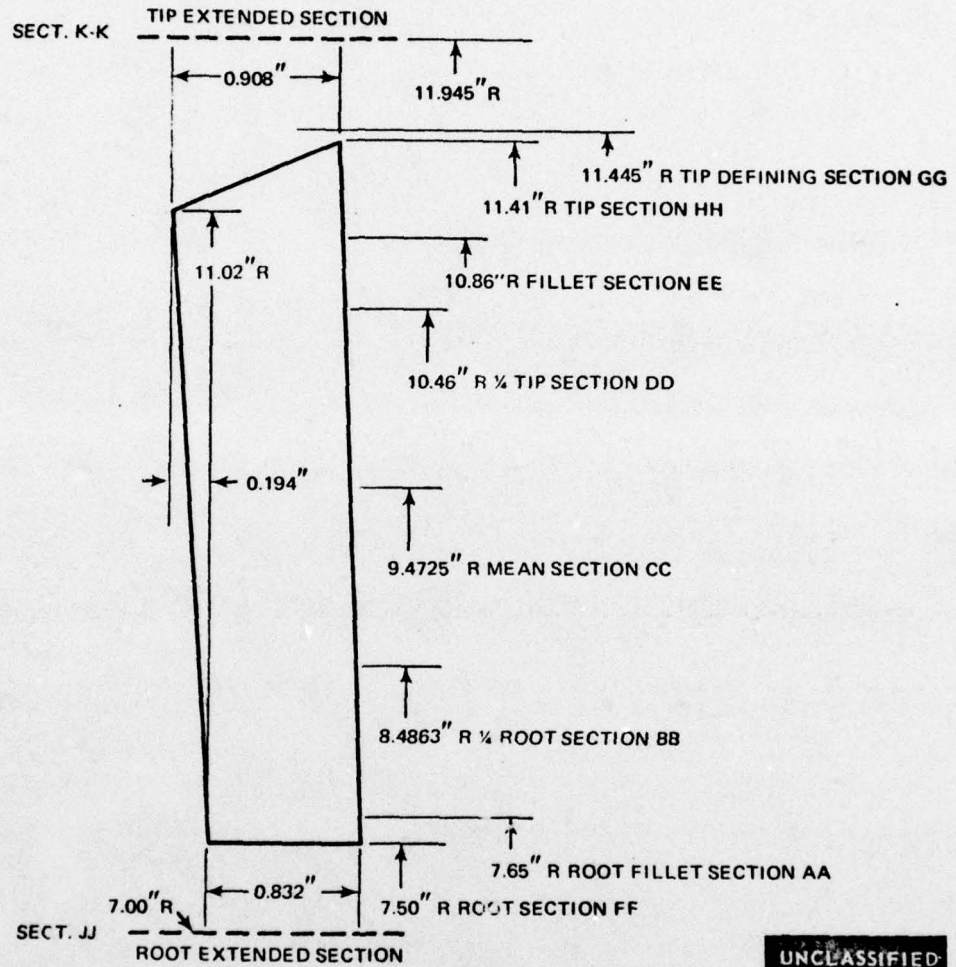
Elevation and Section Location of Second Vane, Recambering Design A
